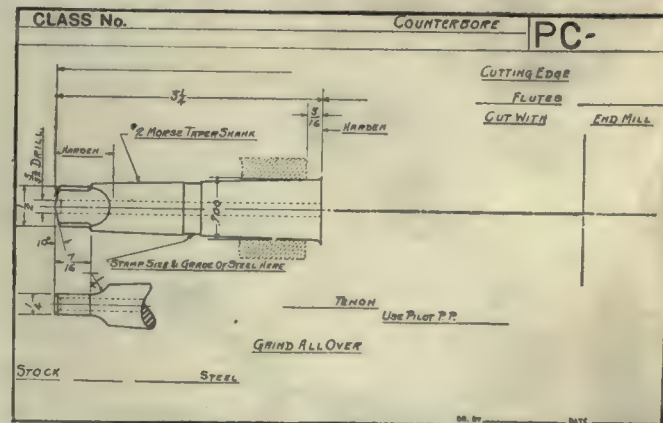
OUTLINES AND DIMENSIONS OF PAPER SHANK
